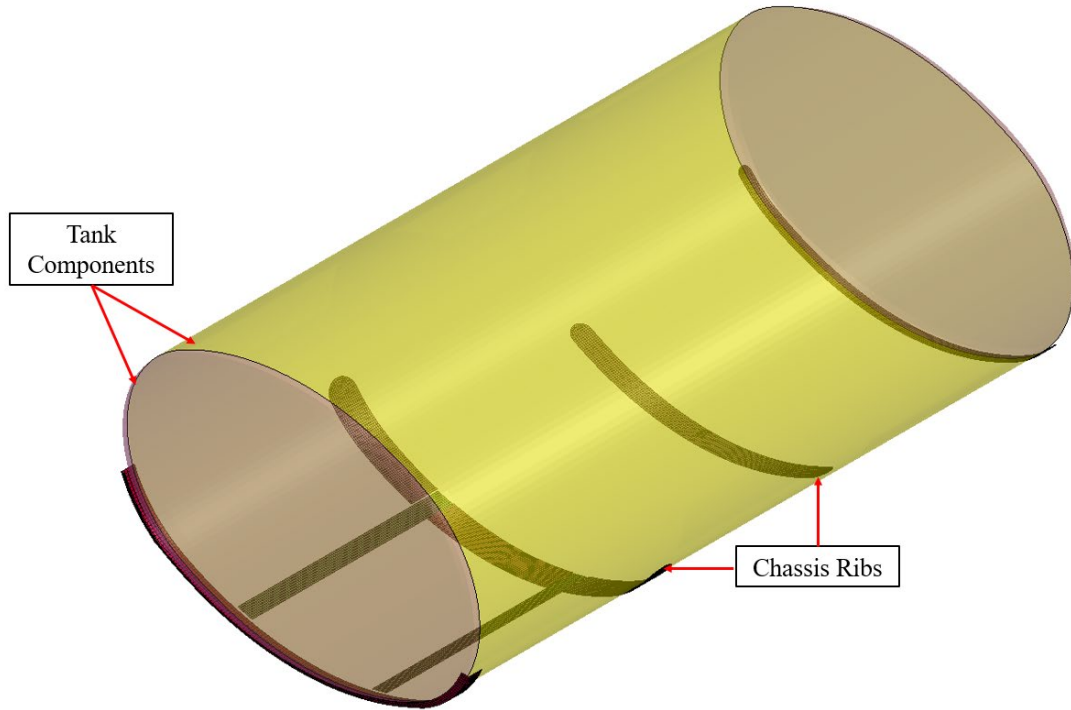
Chassis Ribs Constrained to Tank Shell Using Contact Nodes to Surface
